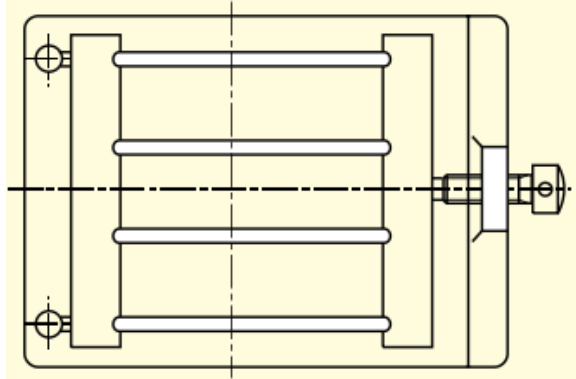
Schematic of mould frame for 160x40x40 mm prisms
